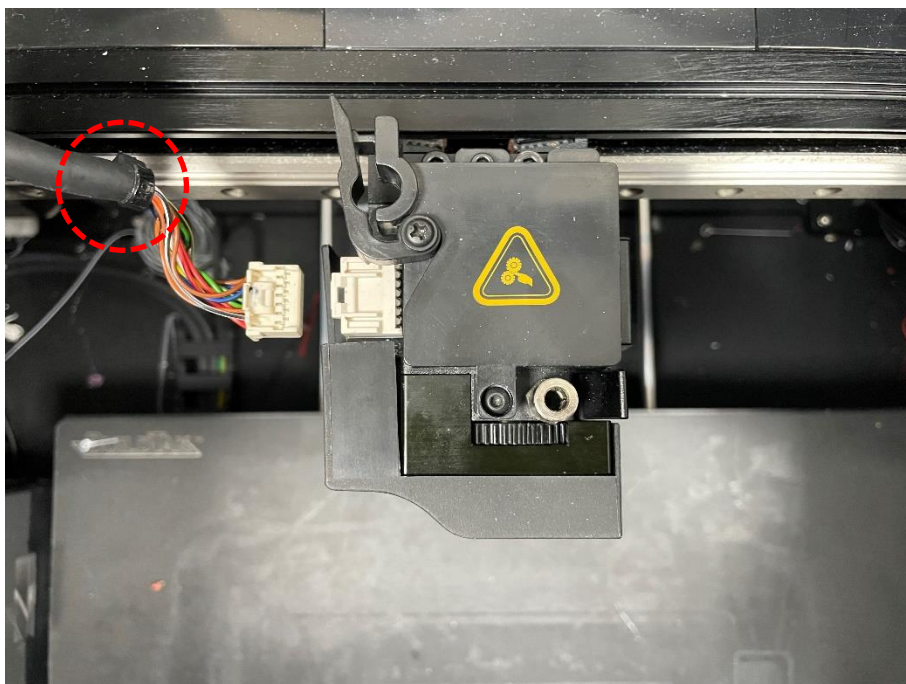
Connect the end of the cable with the zip tie to the extruder.
